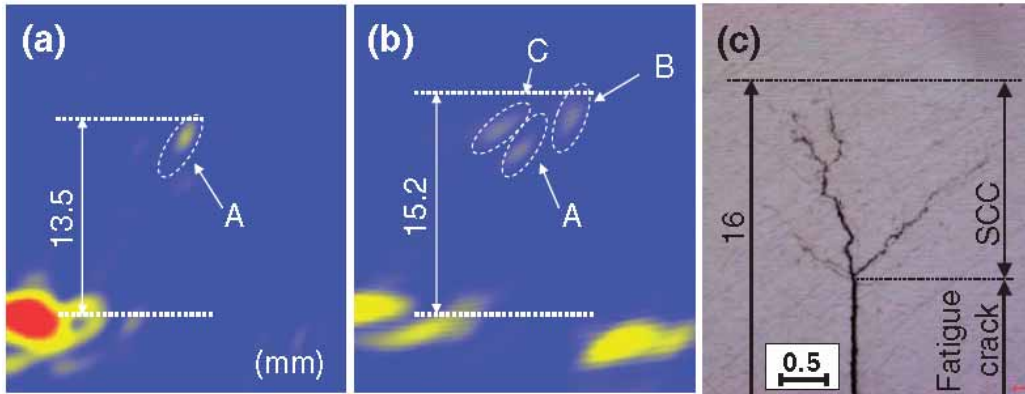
Fundamental (a) and subharmonic (b) images of stainless steel specimen 2 containing SCC cracks. (c) a picture of the etched cross-section (Ohara et al. 2008).
